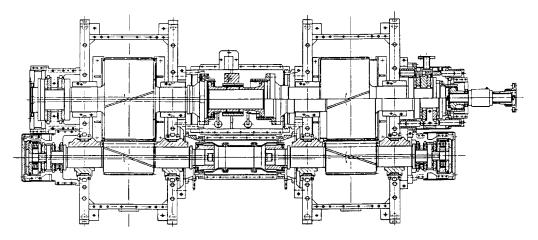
Back-to-back test bed. (Source: MAAG Gear Company.)
